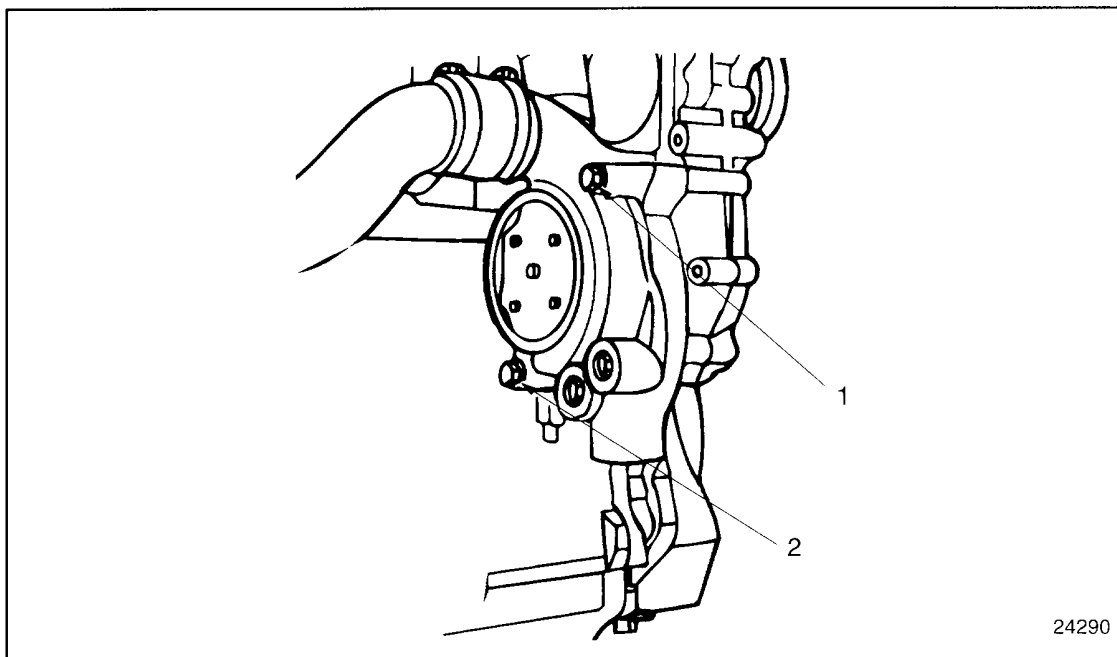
Gear Case Cover Bolt Torque Sequence (Right Rear)
